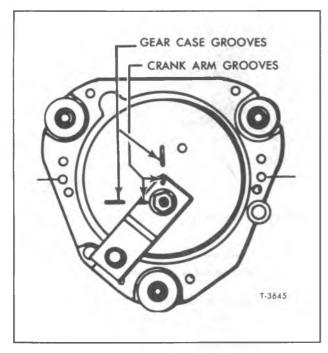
Wiper Crank Arm in Park Position (Conv. Cab Model)
